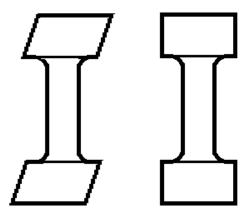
Improper (left) and proper (right) alignment of specimen attachment areas with axis of specimen
